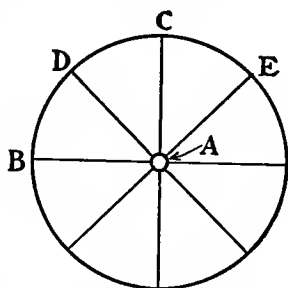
How to Lay Out the Water-Wheel Ends.
